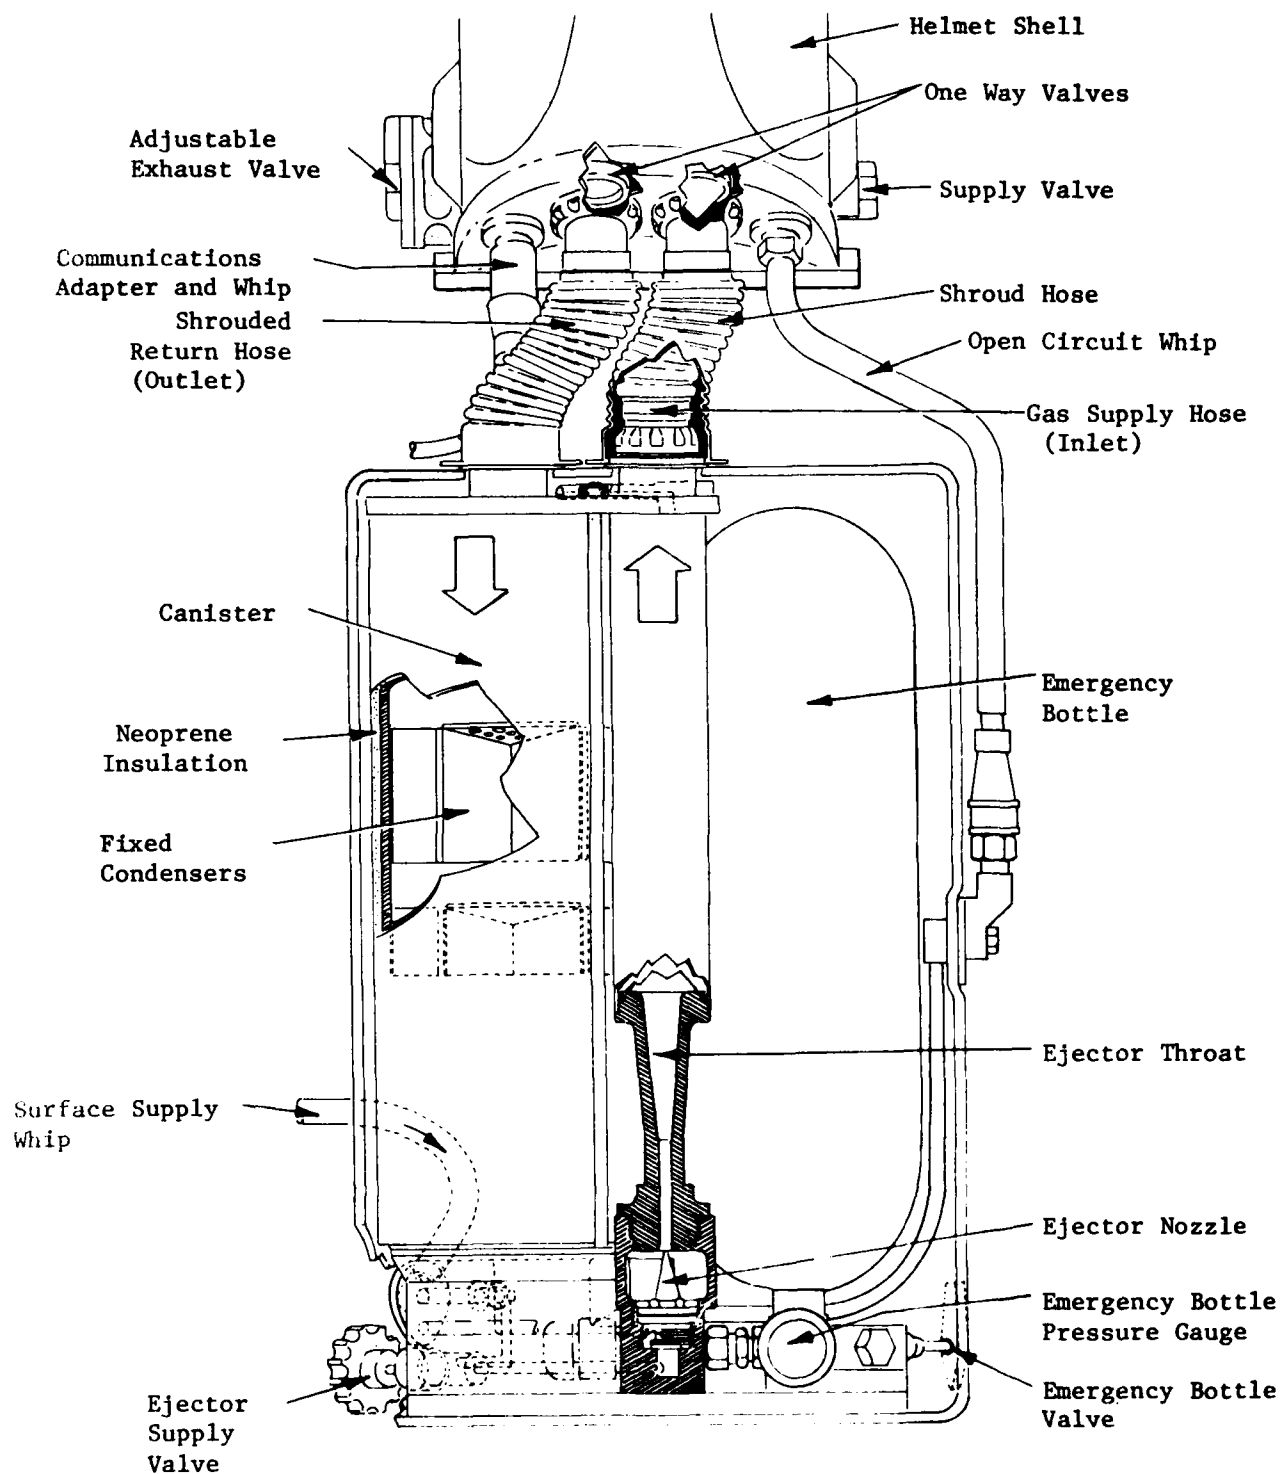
RECIRCULATOR ASSEMBLY WITH HELMET INTERFACE (REAR VIEW)
